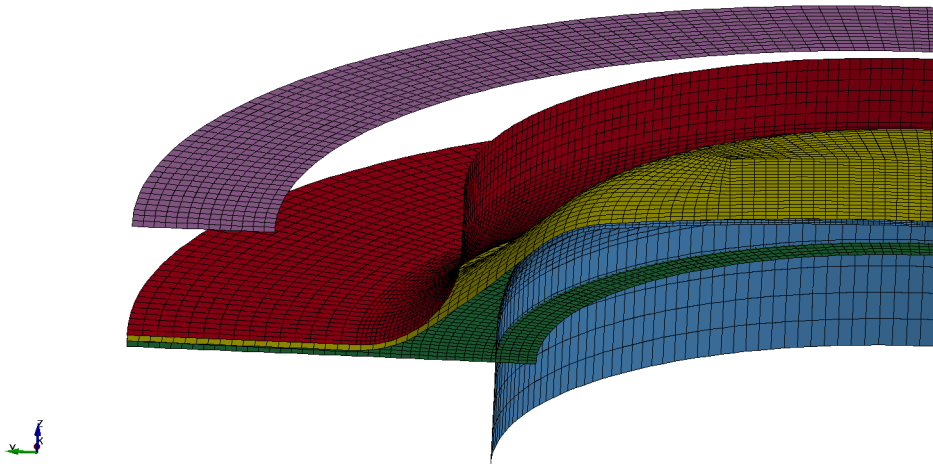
The third forming step, where the red part is the die 6, yellow: the blank, Green: Blank Holder, blue is Punch 5, and purple is the blank holder 2.
